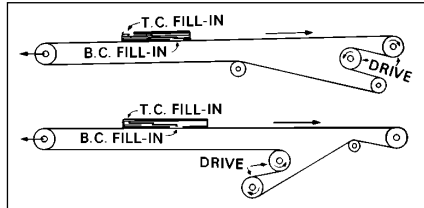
Fig. C - Two dual-drive arrangements contacting bottom side of belt. Step direction is with respect to primary drive pulley.
